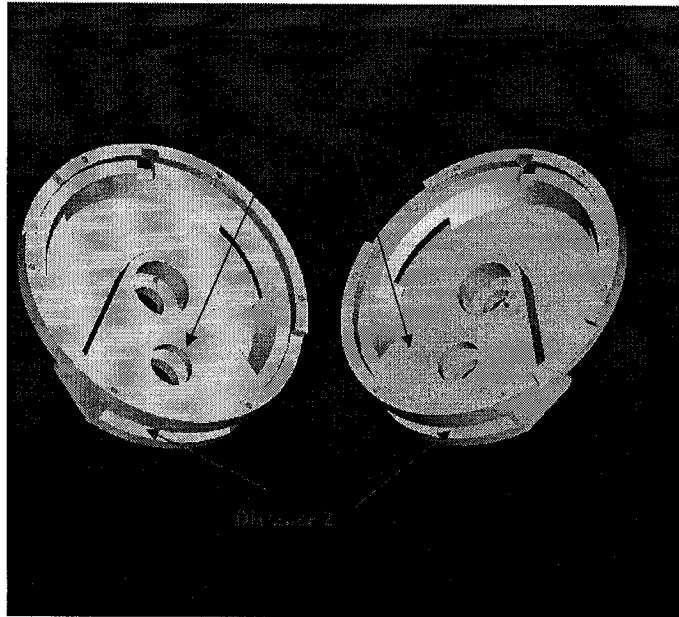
(b) The fixing Positions of Counter Gear 2 on the Transmission Housing
